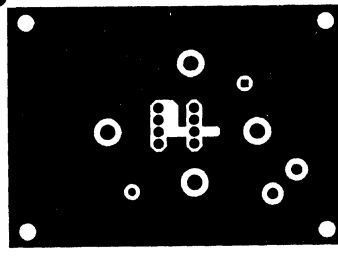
EVALUATION BOARD SCHEMATIC AND LAYOUT
